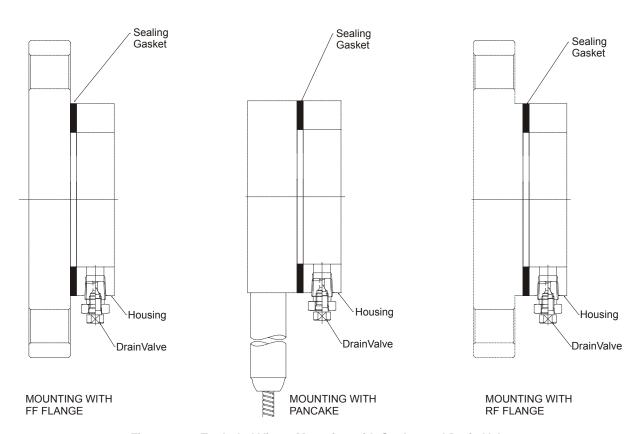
Exploded View - Mounting with Gasket and Drain Valve
